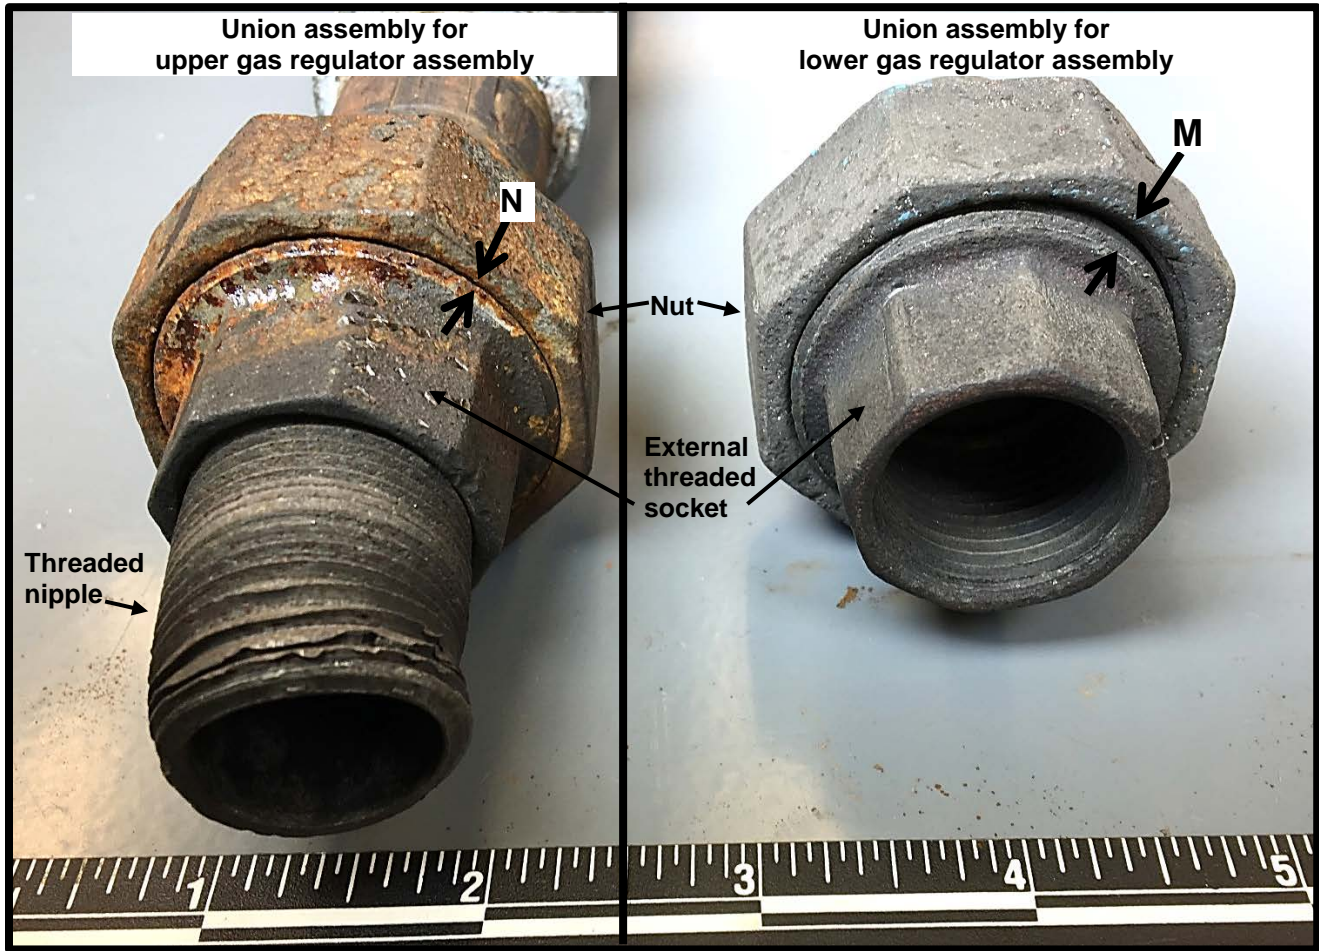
Photograph of the union assembly for the upper and lower gas regulator assemblies when placed next to each other for comparison (after the union assembly for the lower gas regulator was re-assembled). Note the gap between the nut and mating threads on the union assembly for the lower gas regulator assembly in the area between arrows “M”, compared to same respective area on the other assembly (between arrows “N”).
